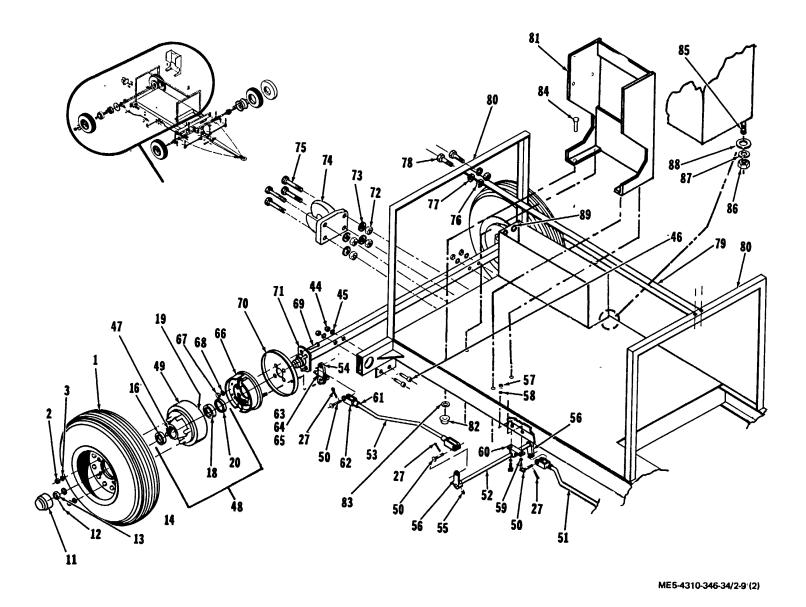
Chassis and Wheel Assy. (Sheet 2 of 2)
